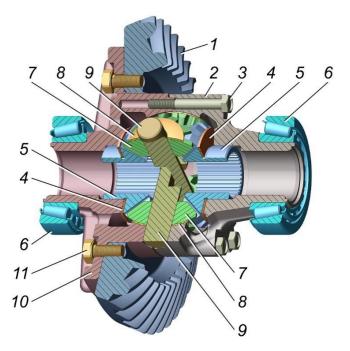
Differential assembly with driven gear: 1 – driven gear; 2– right differential spider; 3,11 – bolts; 4 – side gear washer; 5 – side gear; 6 – bearing; 7 – pinion gear; 8 – pinion gear washer; 9 – pinion gear axis; 10 – left differential spider.
